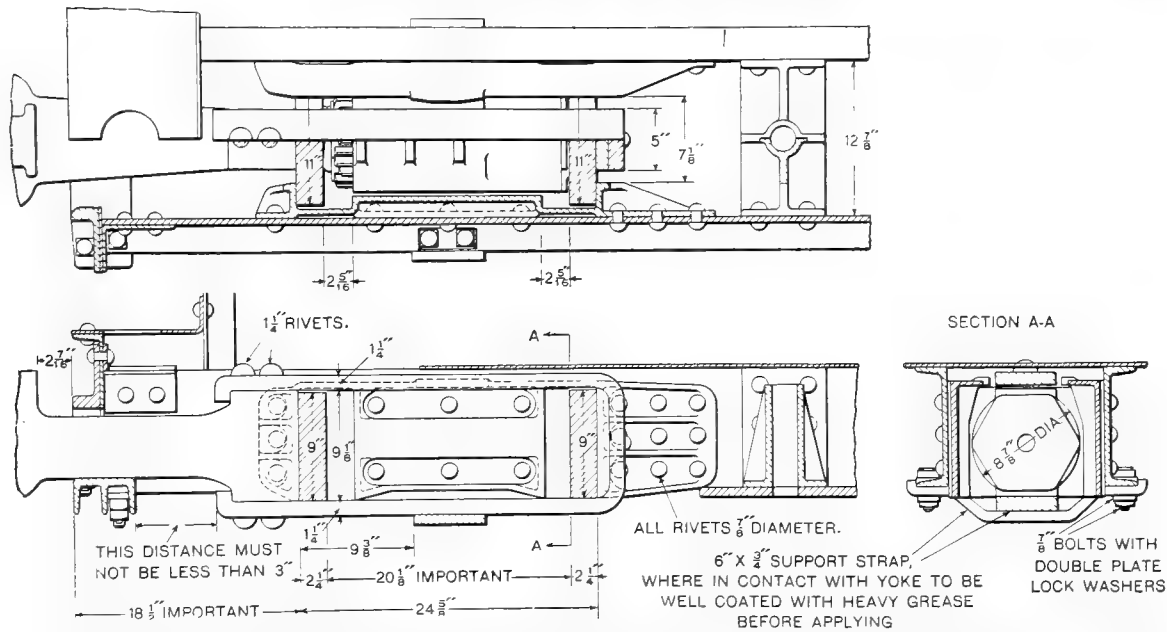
Westinghouse Type D-3 Friction Draft Gear with Continuous Draft Plates with Limiting Stops, for Steel Underframe Freight Cars. Westinghouse Air Brake Company.
